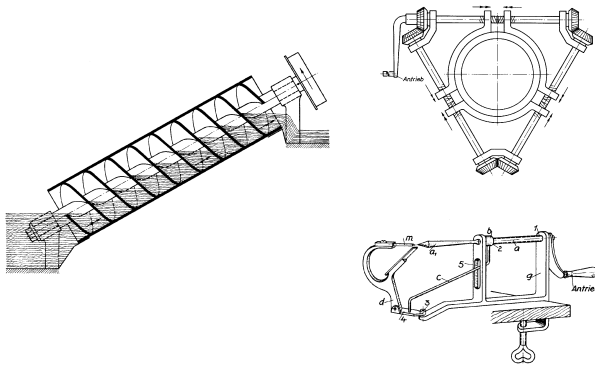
Three modern mechanism examples based on screws by A. Widmaier.
